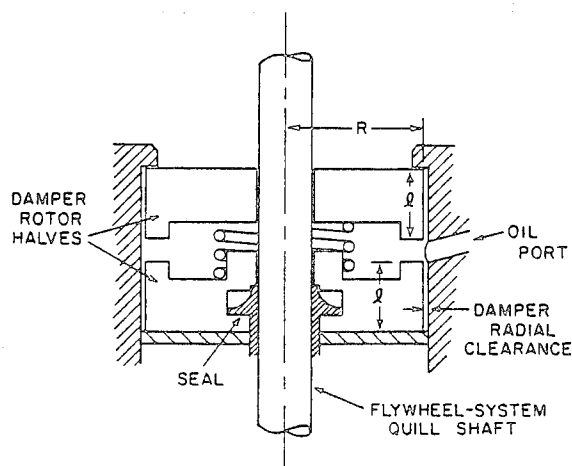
Schematic diagram of the Barbour Stockwell damper installed as part of the flywheel spin-test system.
